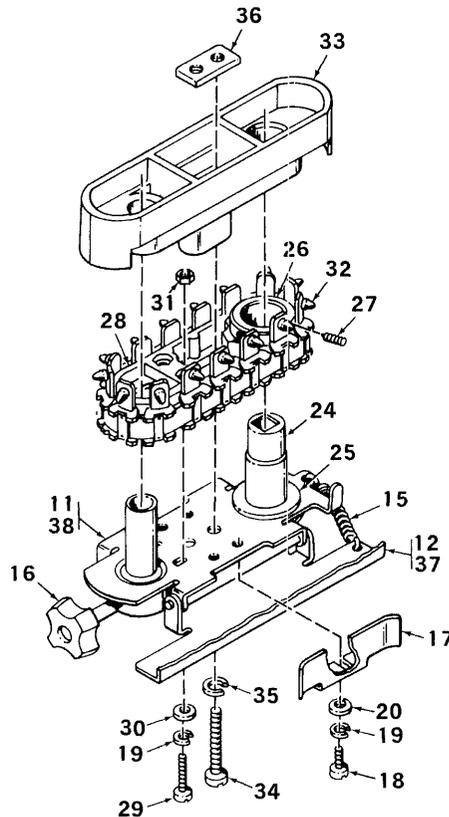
REMOVAL OF BELT (32) IDLER SLIDE (28), AND DRIVE PULLEY (26)
